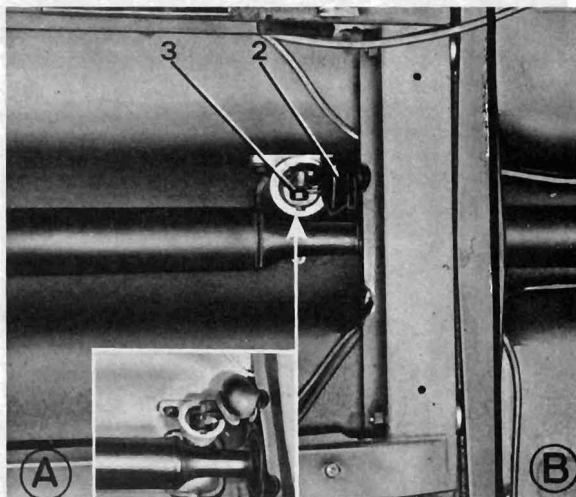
A Gear lever connection to link rod (Sec 11)
